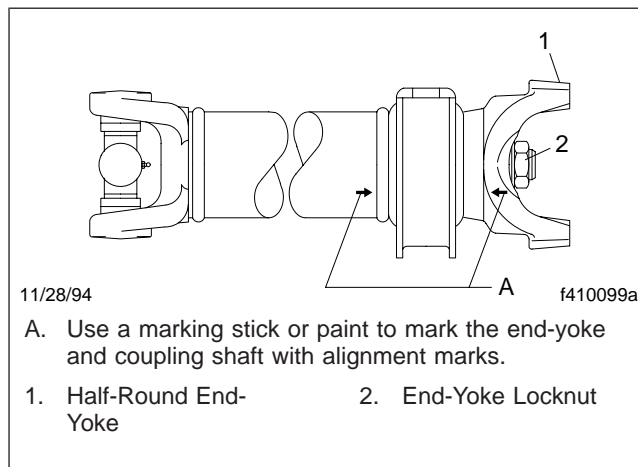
, Alignment Marks on a Coupling Shaft With an End-Yoke
